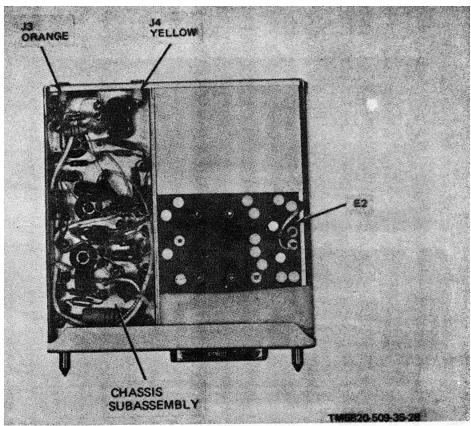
Radio Frequency Oscillator O-1032/PRC-47(A8A6), Side View, Cover Removed, Location of Chassis Subassembly and Test Points.
